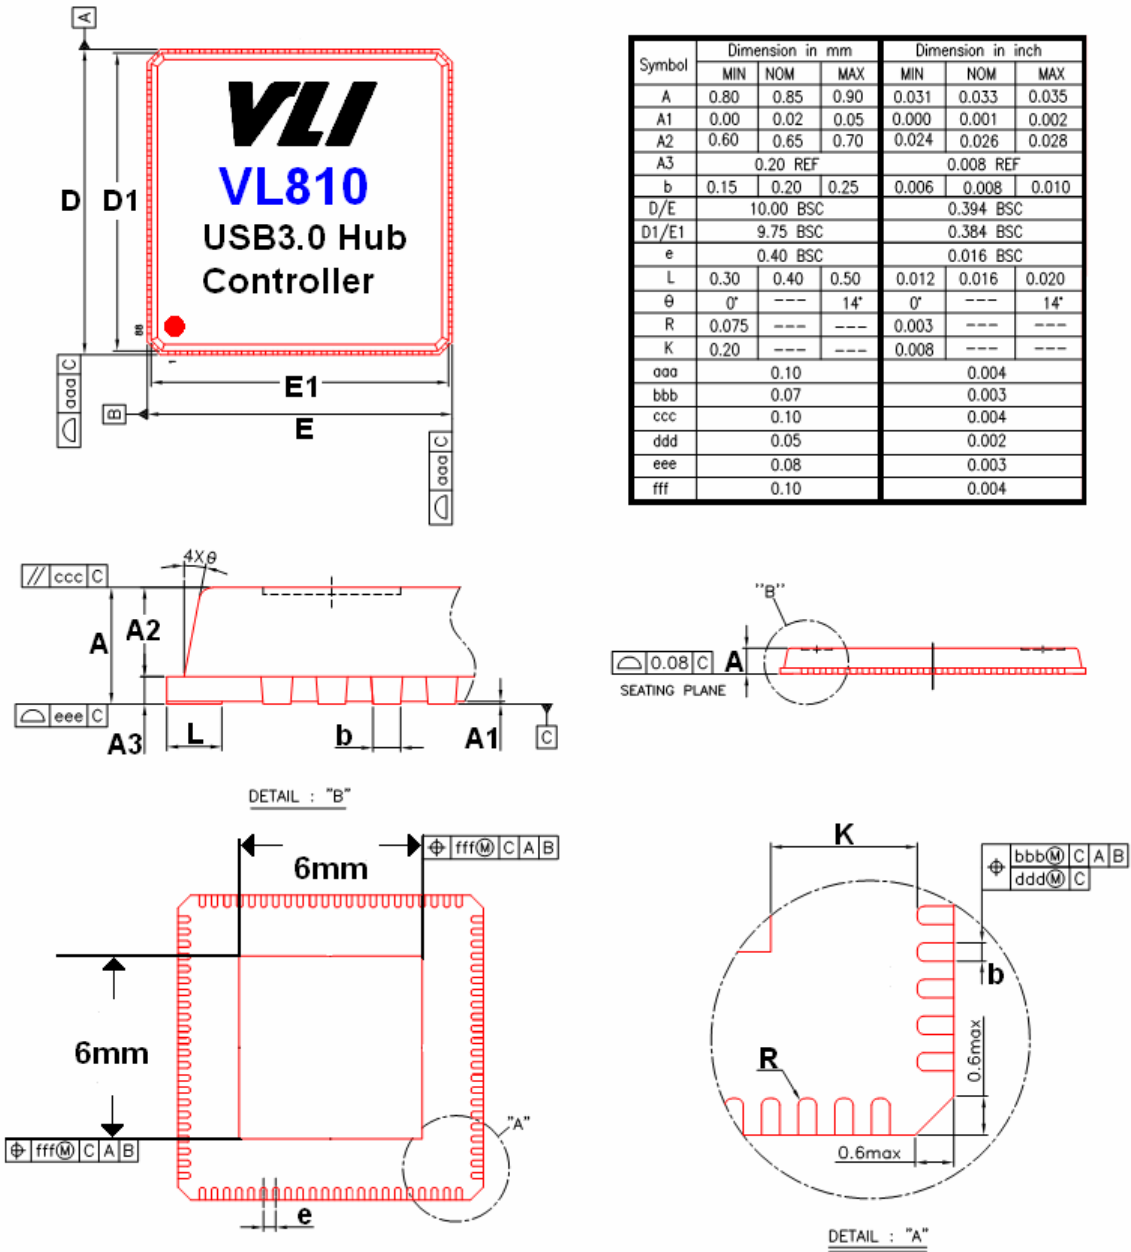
Mechanical Specification – QFN 88L 10x10x0.85 mm Package
